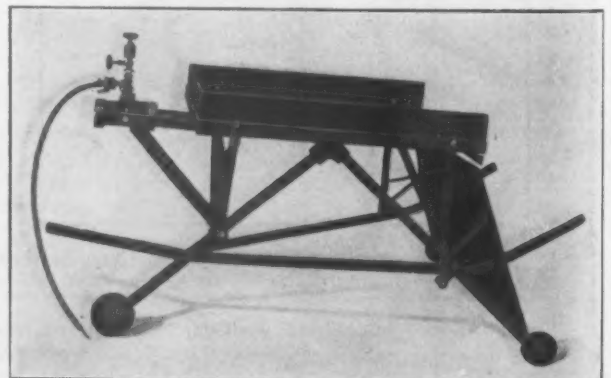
A Large Tripod Shaker Made by the Hanna Engineering Works, Chicago, Ill.
